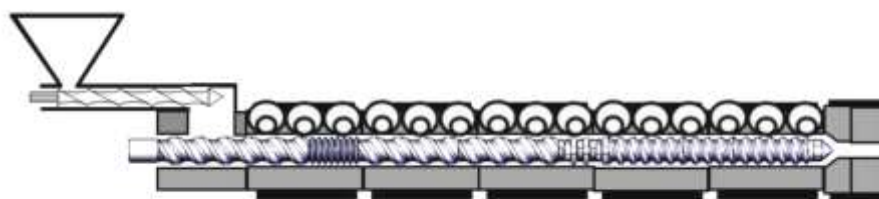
Schematic representation of the prototype modular co-rotating twin screw extruder [104].
